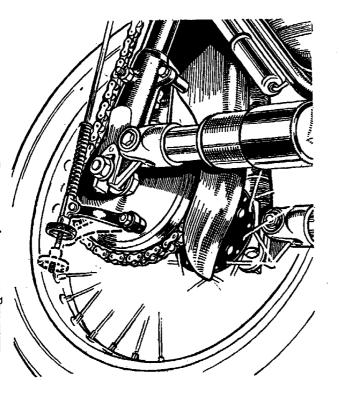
(b).—Showing Rear-brake Adjustment Exhausted
